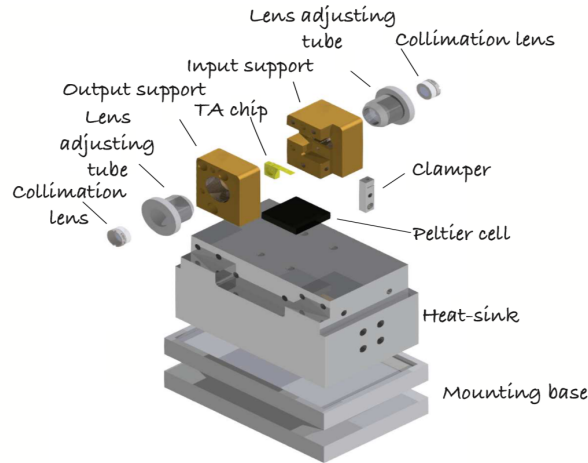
Exploded view of the tapered amplifier mounting. Adapted from [116].
